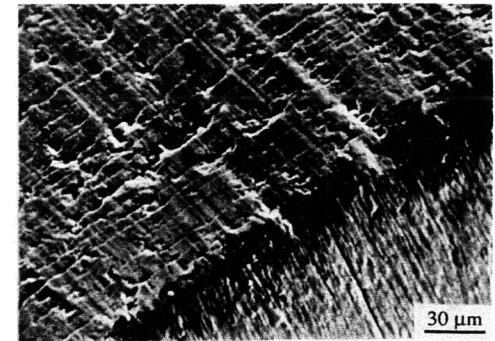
Tribo fracture by contact fatigue of a steel punch.
